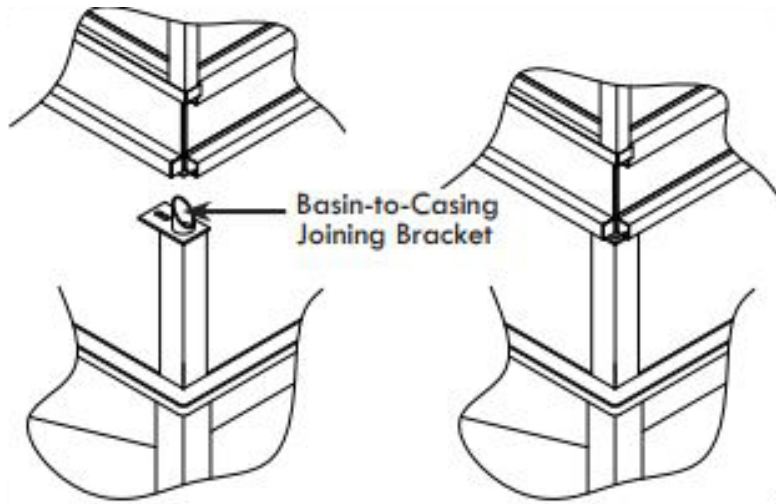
Joining Casing to Basin section (HDG & SST coils)
